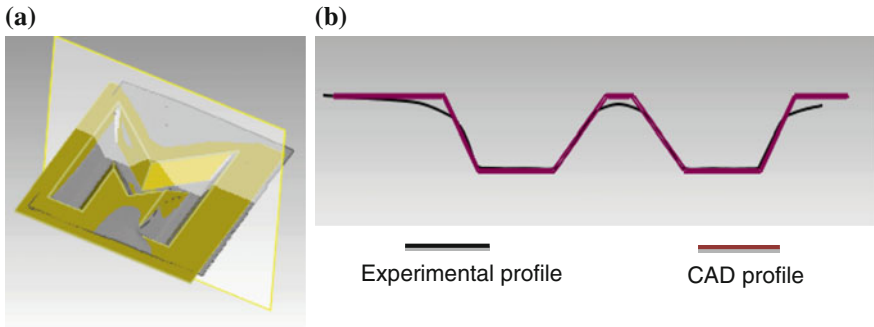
Comparison of CAD model with formed M shape with support. a Section plane. b Cross section
